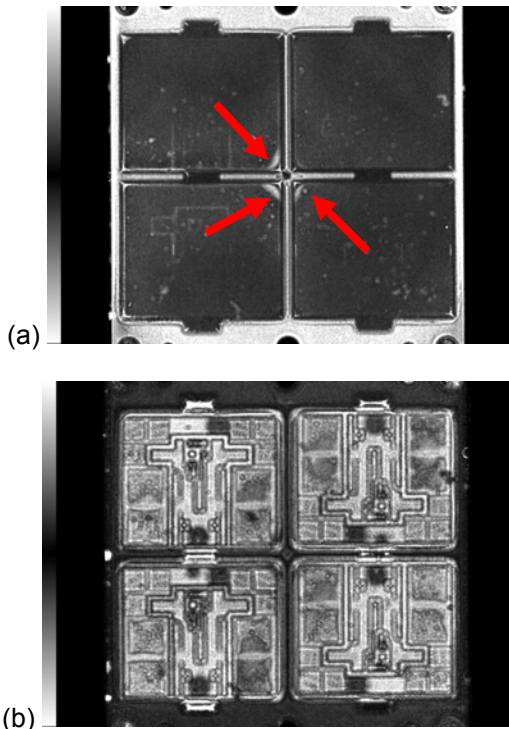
Ultrasonic images of (a) substrate solder and (b) chip surfaces. The system solder shows starting delamination (red arrows). The chip solder of the IGBT dies shows signs of heavy damage.
